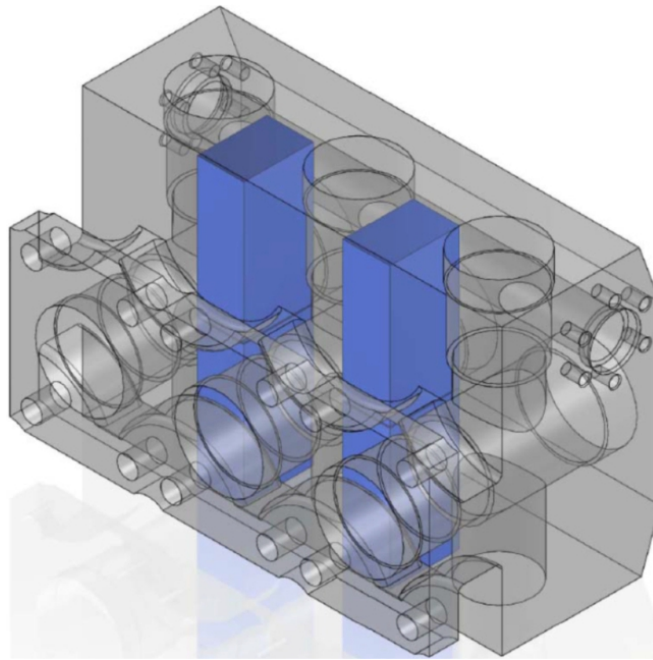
Section detail for rectangular components - Photo courtesy of Weir SPM.
